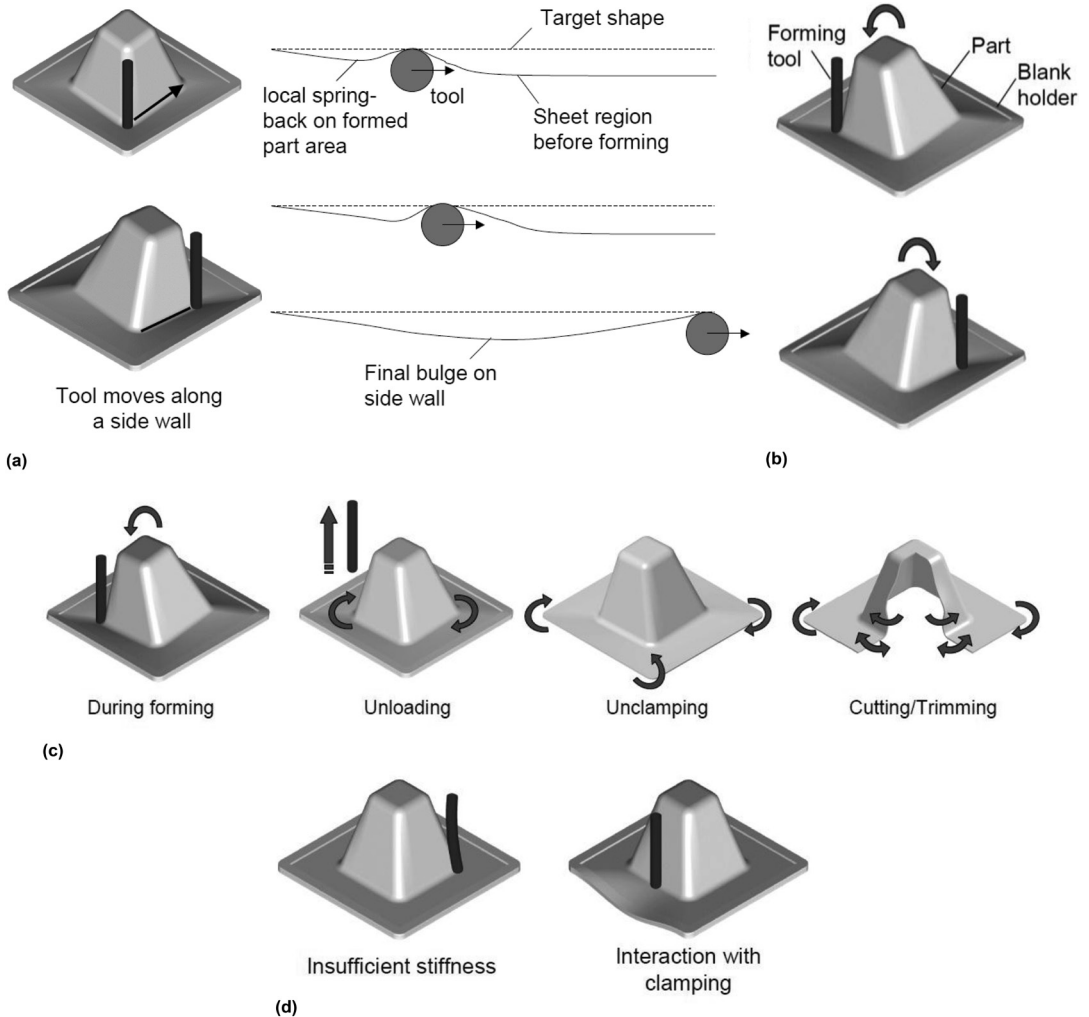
Elastic effects and springback in incremental sheet forming. (a) Local springback under the tool. (b) Orbital motions of a part around the die. (c) Elastic deformations upon unloading, unclamping, and cutting/trimming. (d) Interaction with the machine structure. Source: Ref 13.2
